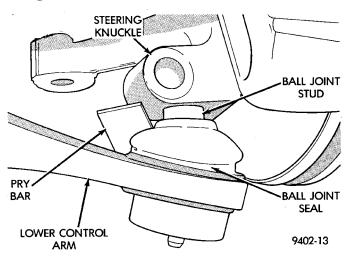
Separate Ball Joint Stud from Knuckle Assembly
